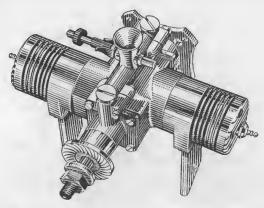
This twin-cylinder 2.5 c.c. glow engine has front rotary (crankshaft) induction, with the fuel mixture drawn into the crankcase through the centre of a hollow crankshaft.
